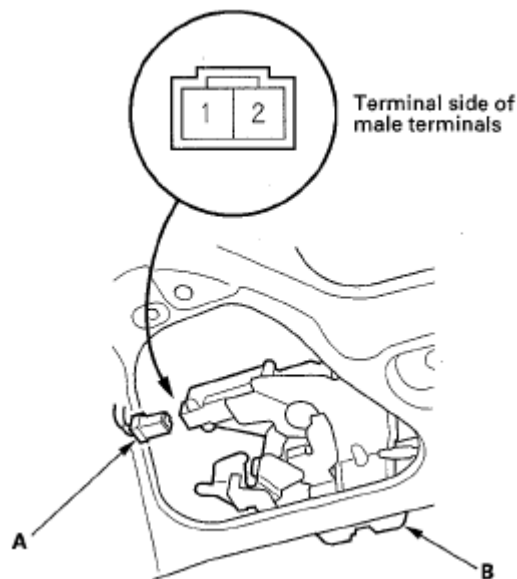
Identifying Hatch Lock Actuator 2P Connector Terminals
